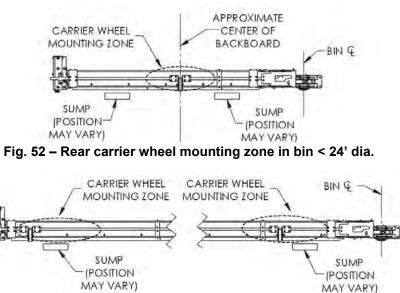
Rear carrier wheel mounting zones in bin \ge 24' dia.
